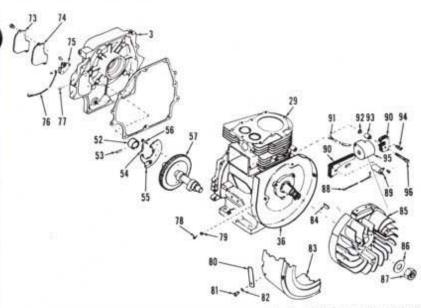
Exploded view of magneto ignition components used on Models HH80, HH100 and HH120. Timing advance and breaker points used on engines equipped with battery ignition are identical.
